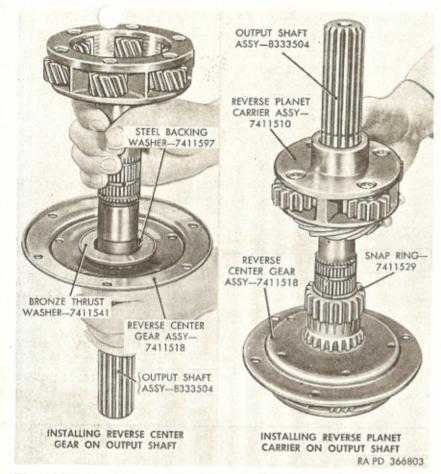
Installing reverse center gear and reverse planet carrier on output shaft.
